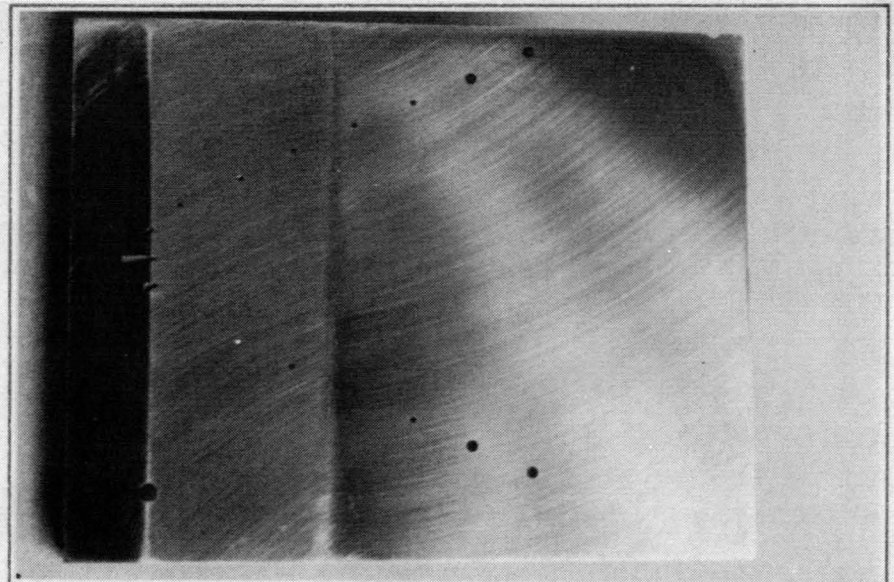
Segment 3M with 3 planar surfaces ground to expose pre-drilled holes
